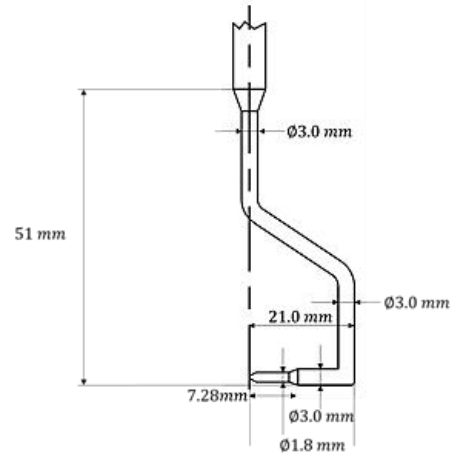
Cobra five holes probe P-PNEU-C5HP-01
